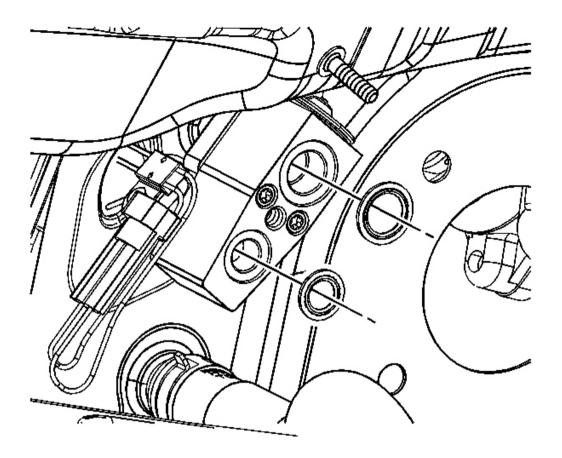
TXV, Bolts & Backing Plate Courtesy of GENERAL MOTORS CORP.
